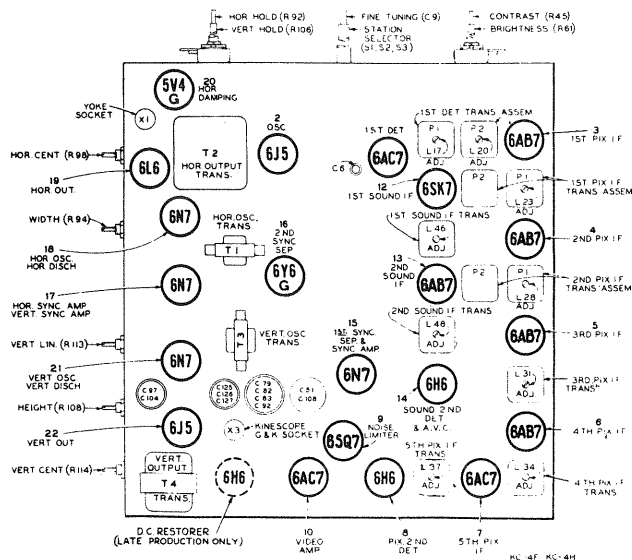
B—Top View TRK-90, TRK-120 Video Chassis
